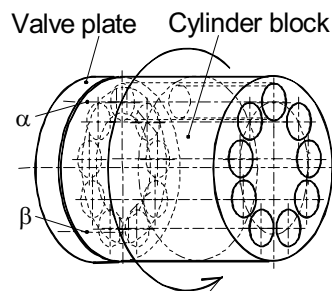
Location of thermo-couples installed in the valve plate (rotating cylinder-block type piston pump)
